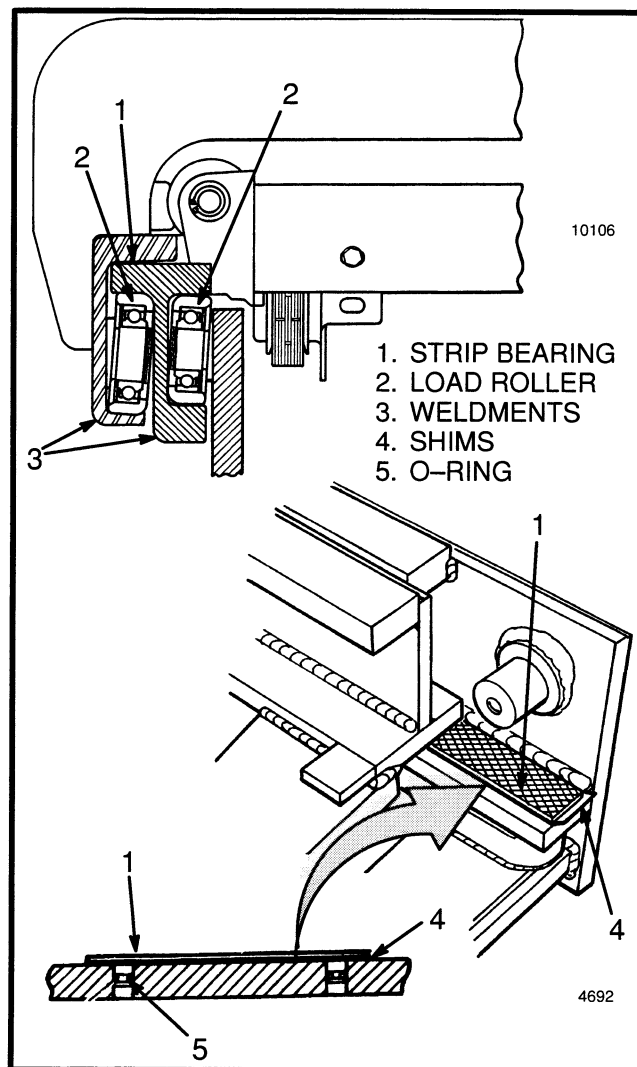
ADJUSTMENT OF THE STRIP BEARINGS
